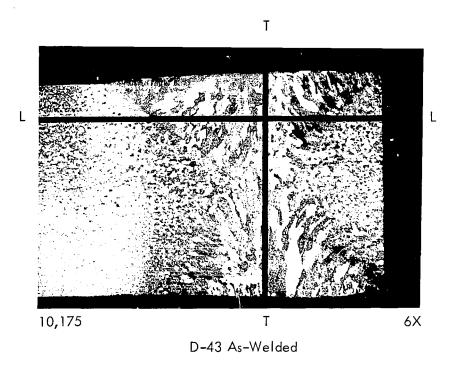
D–43 Welded Plate, Weld Microstructure
